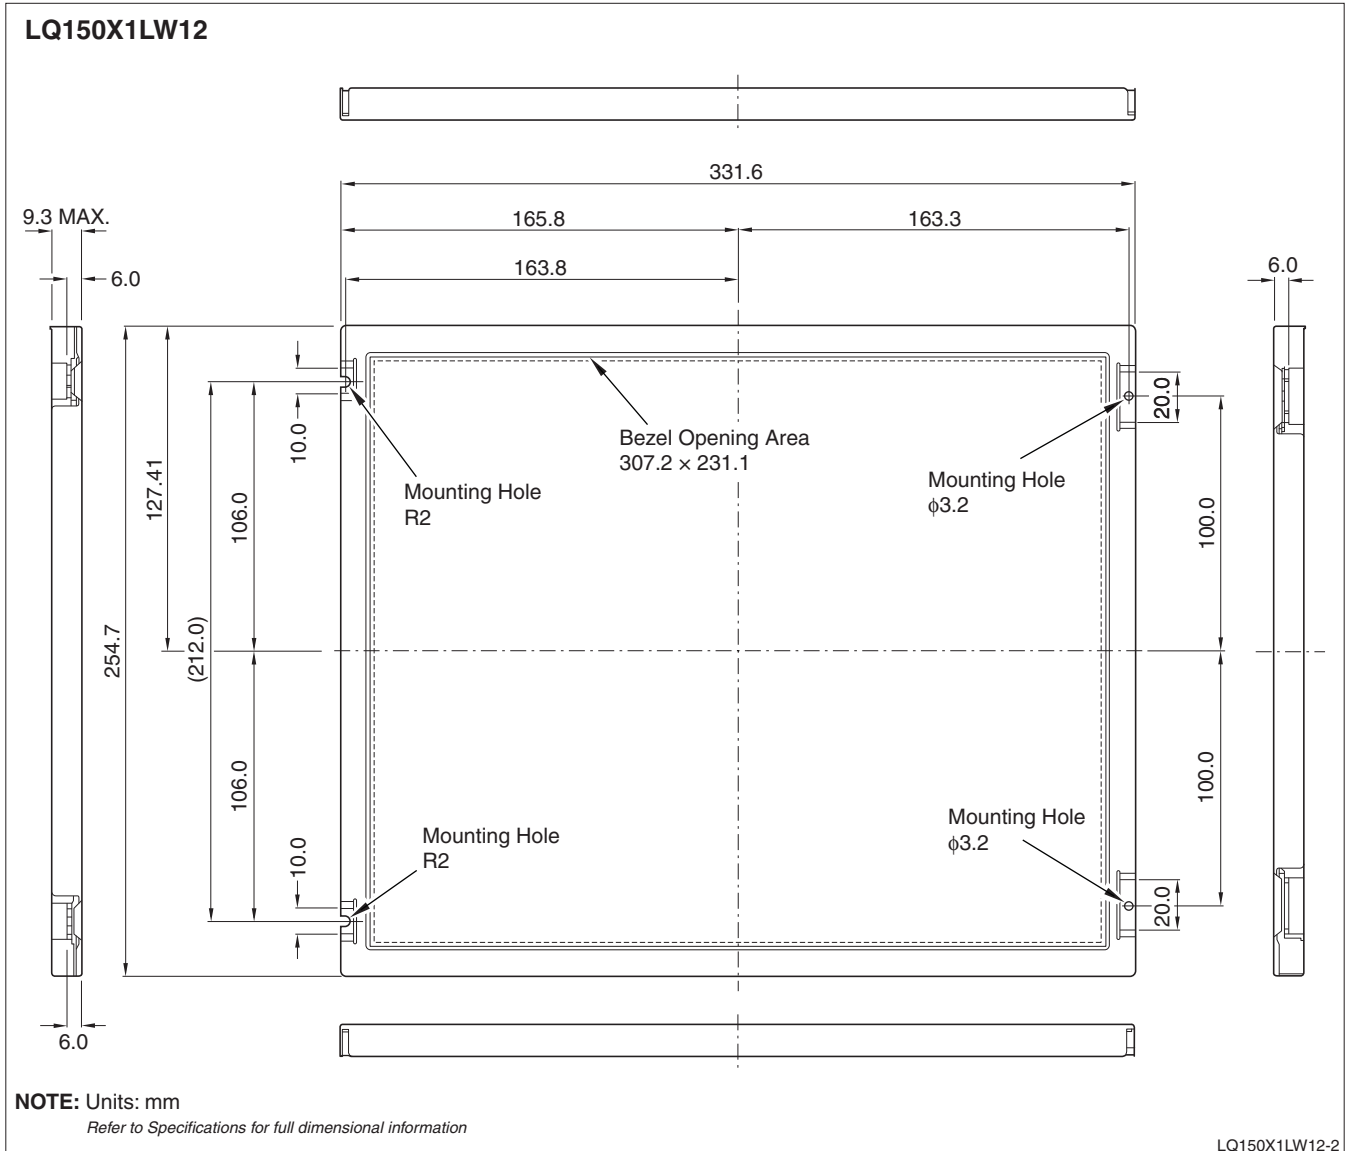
Mounting Dimensions for LQ150X1LW12 (Upgrade)
